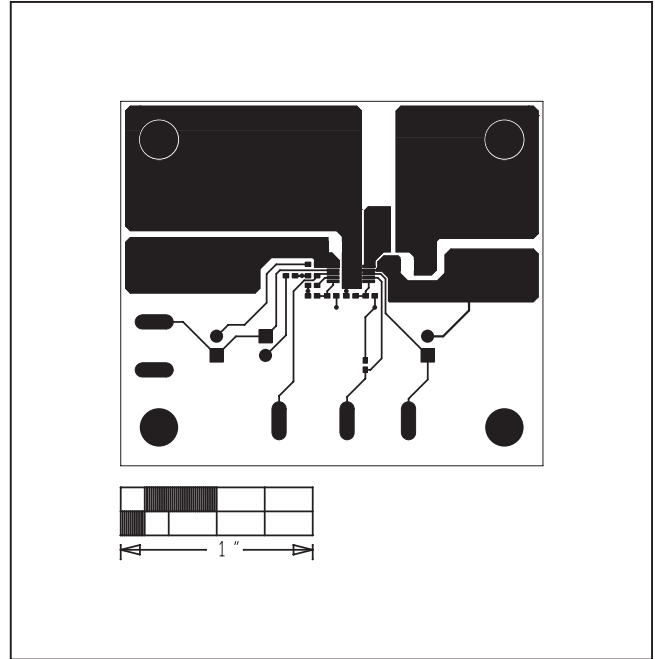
MAX17552 5V EV Kit (μMAX) PCB Layout—Component Side
